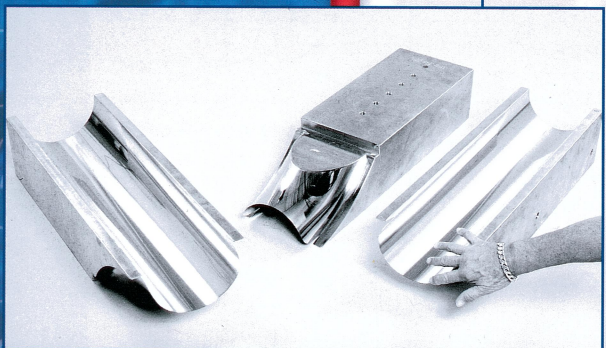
To prevent tube scratches and prolong tool life, the new TFB wiper die finishing process provides extraordinary polished tube grooves and C.L.R. machined surface.
